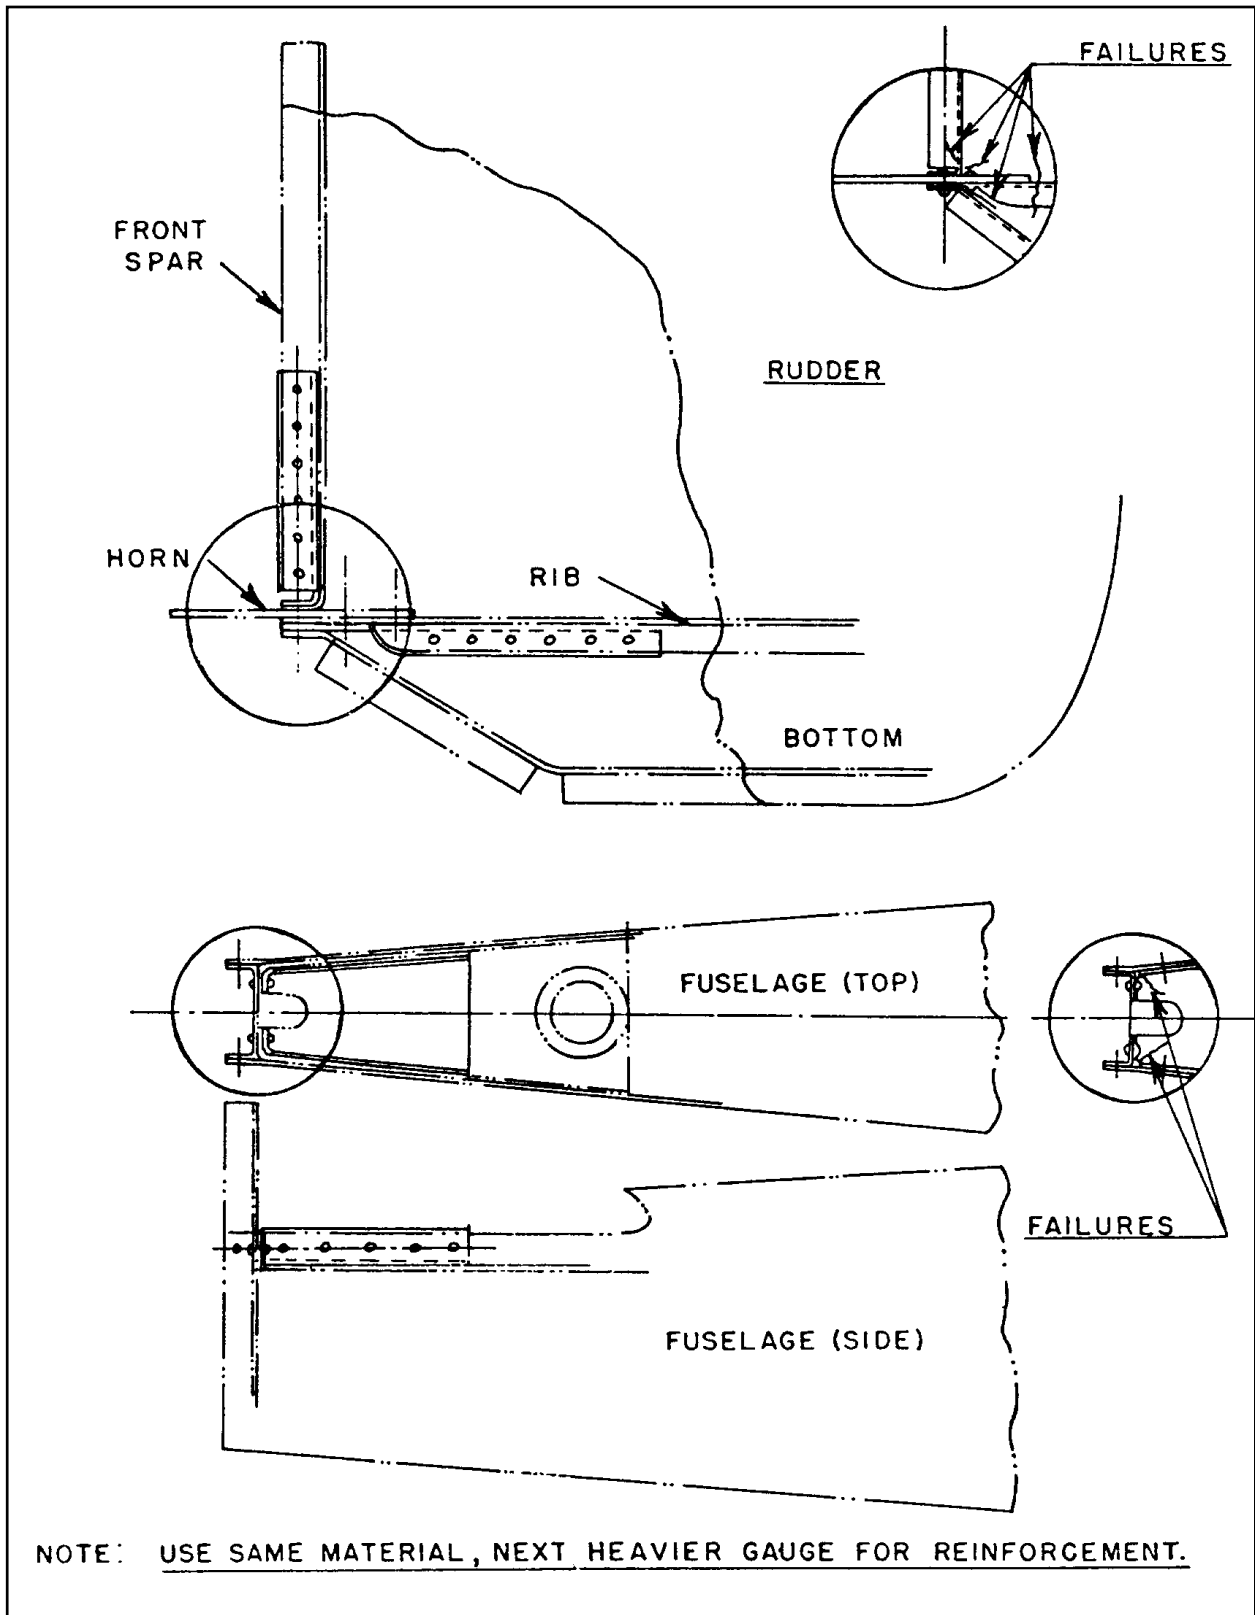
Typical repairs to rudder and to fuselage at tail post.
